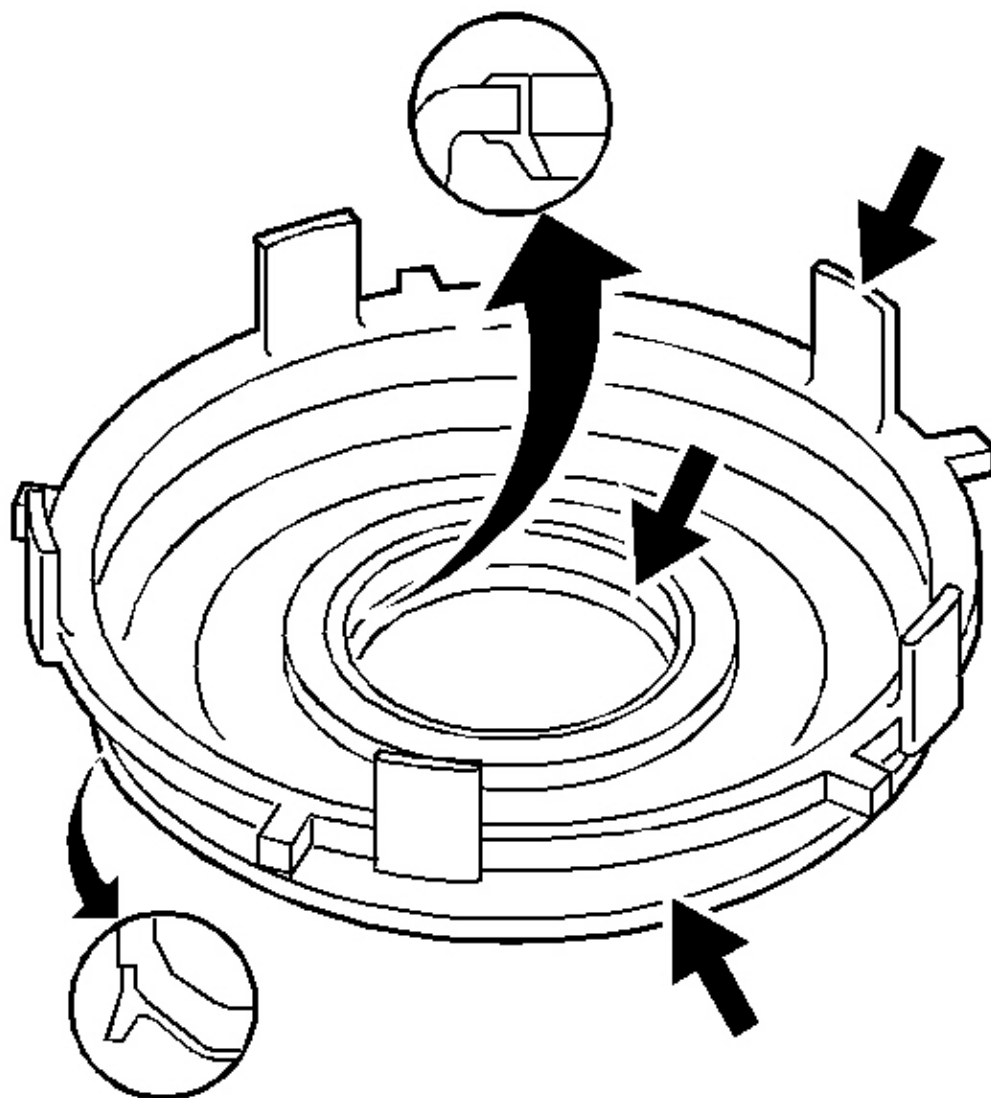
Inspecting Forward Clutch Piston For Damage Or Wear
